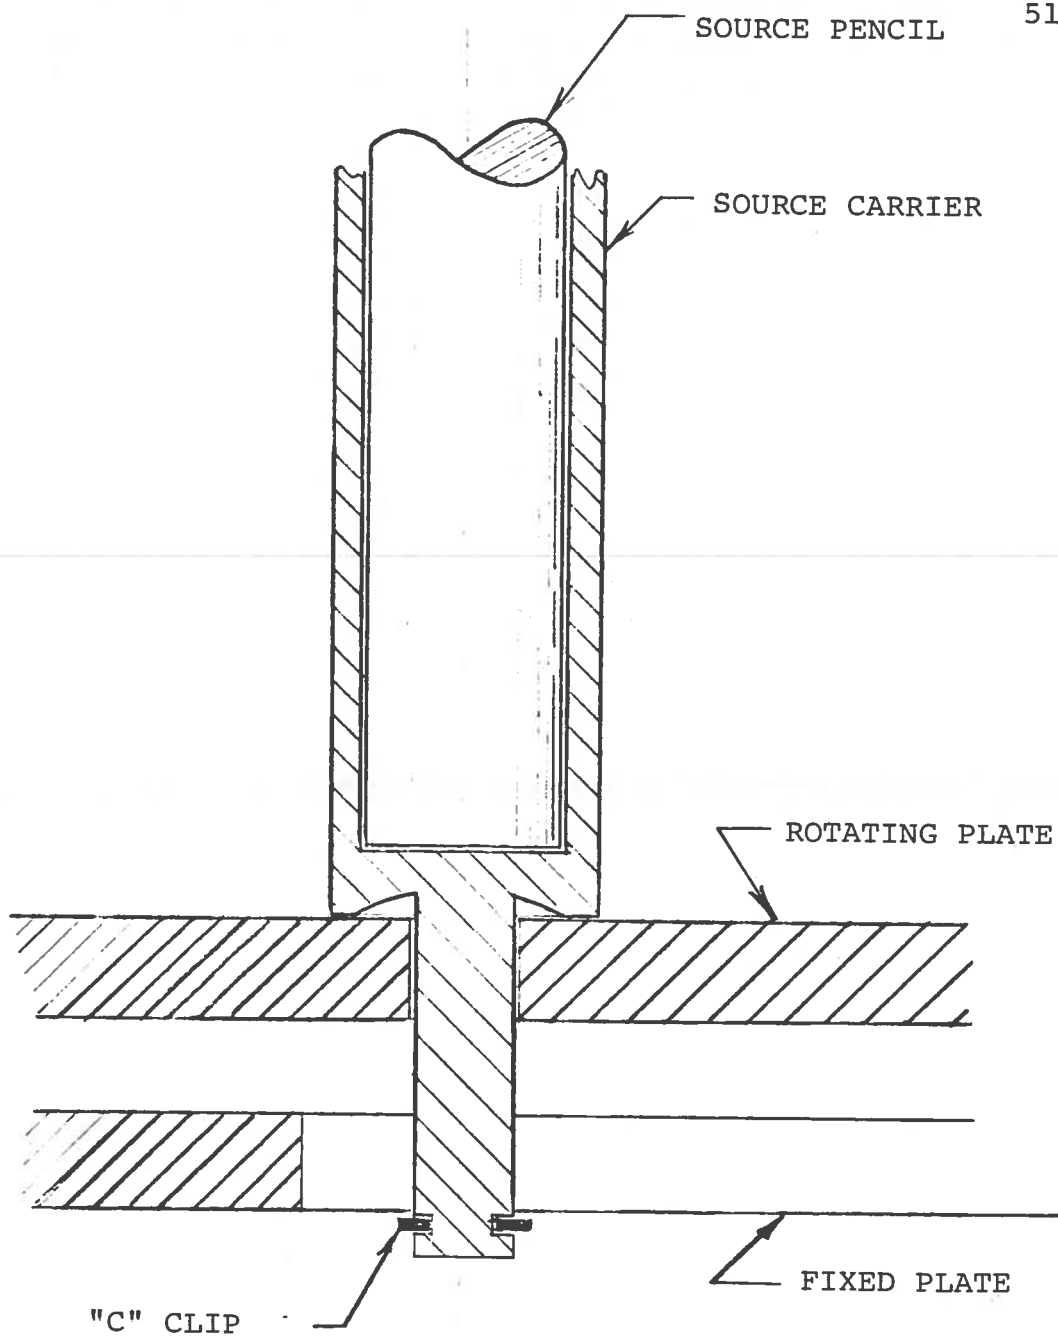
The Source Carrier Arrangement on the Moving and Fixed Plates.
